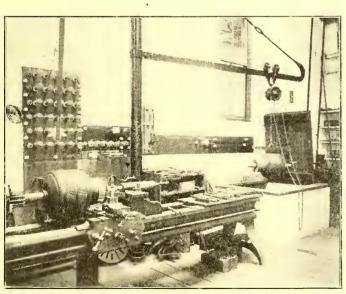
SCENE IN SHOPS, SHOWING LATTIE, TESTING RACK, ARMATURE OVEN AND SWINGING CRANE
